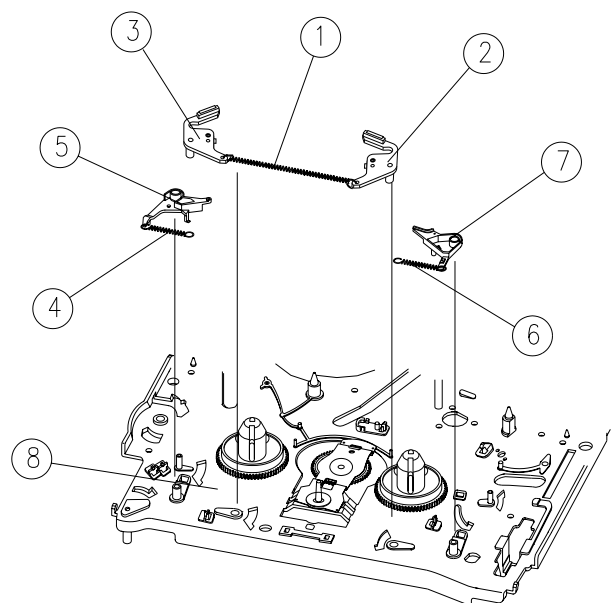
S/T MAIN & SUB BRAKES REMOVAL
